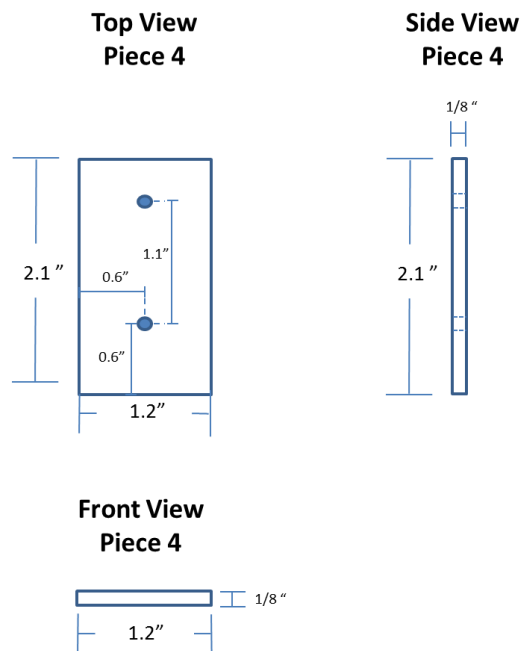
Schematic of piece 4 for motorized stage fixture.
